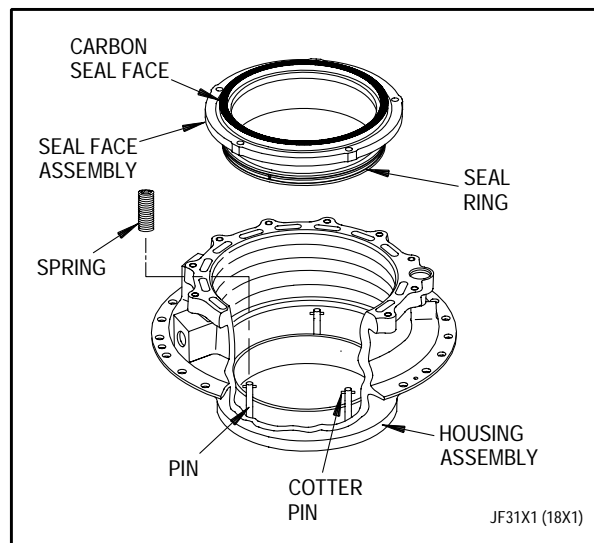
No. 1 Bearing Seal Face Assembly and Seal Ring - Removal
